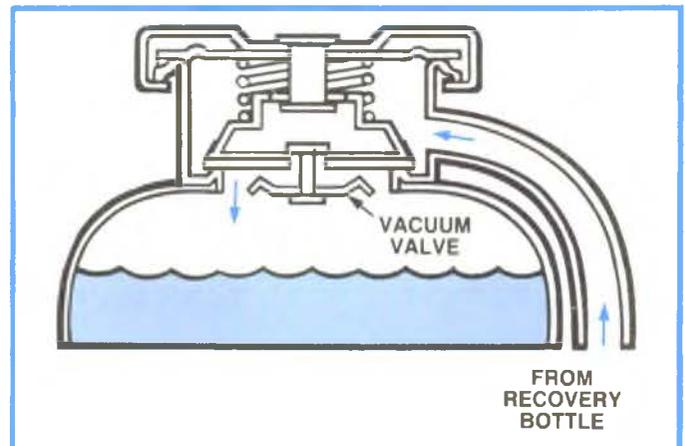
, Radiator Cap With Vacuum Valve Open.
